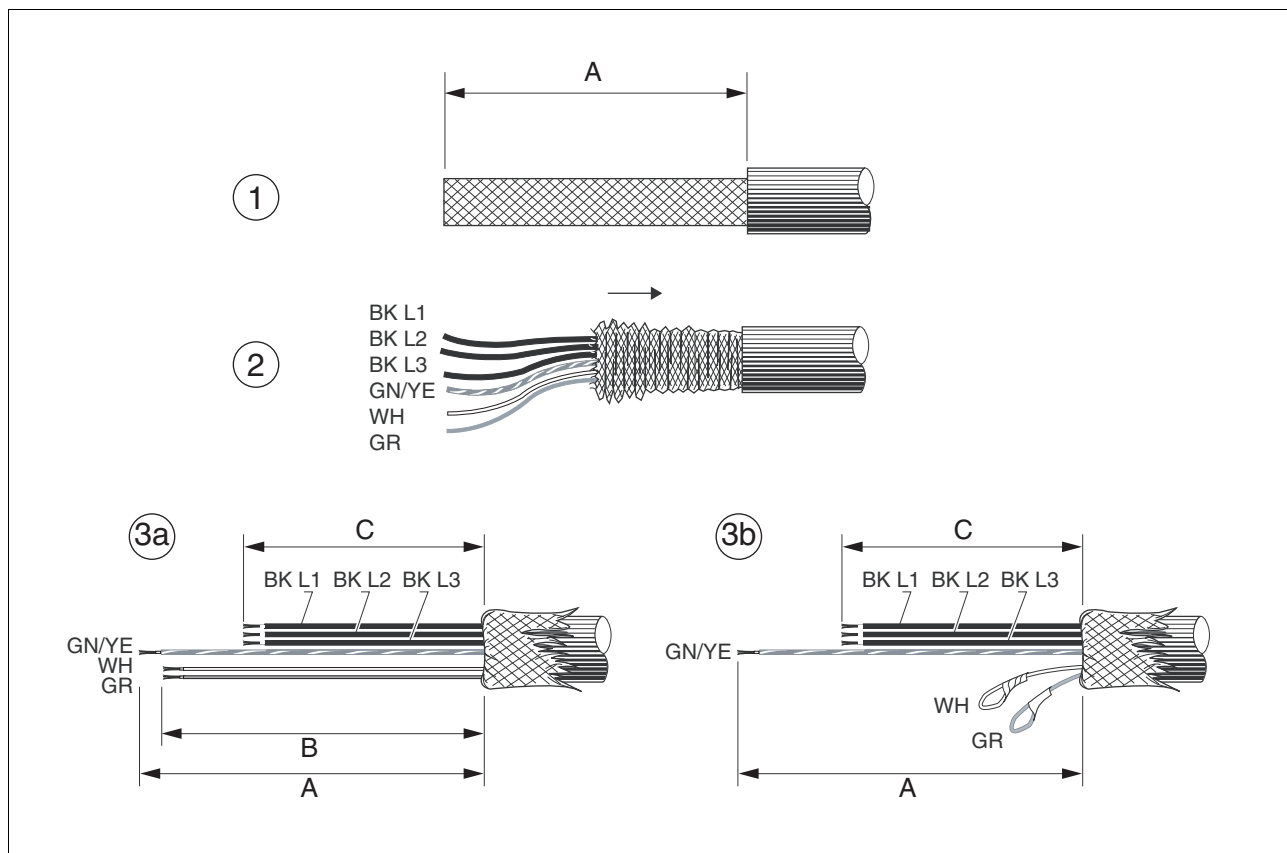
Steps (1-3) for fabrication of the motor cable
